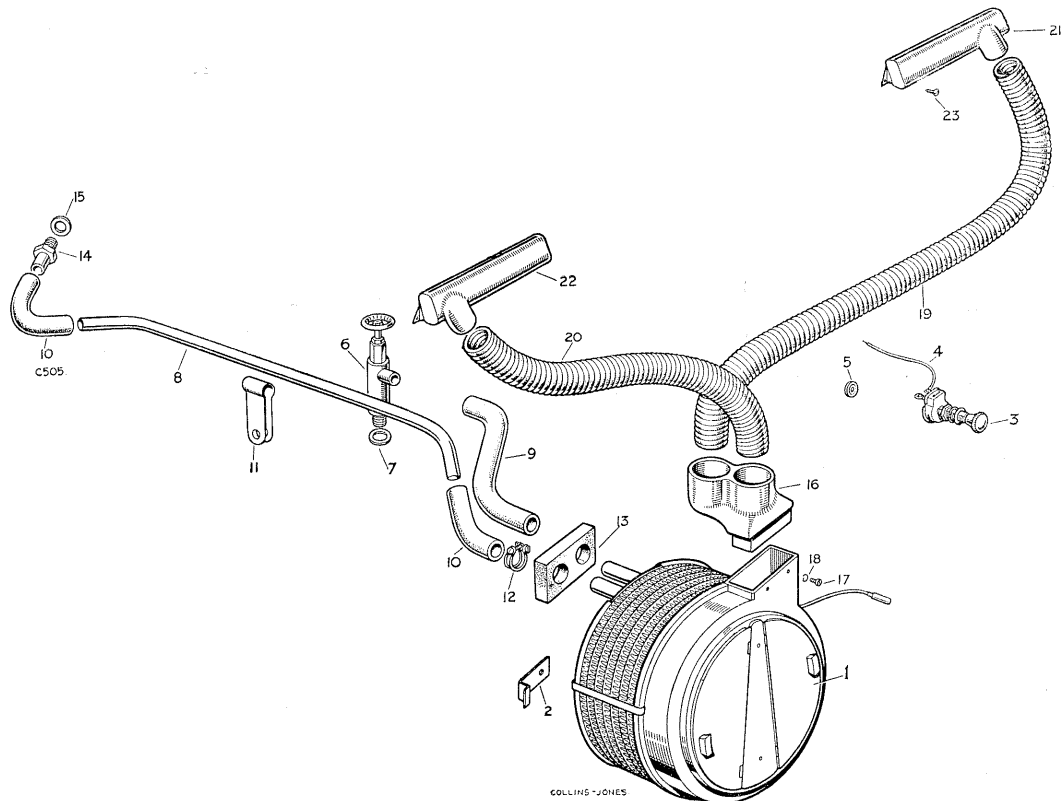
Layout of heater unit—2½ litre Petrol and Diesel models
